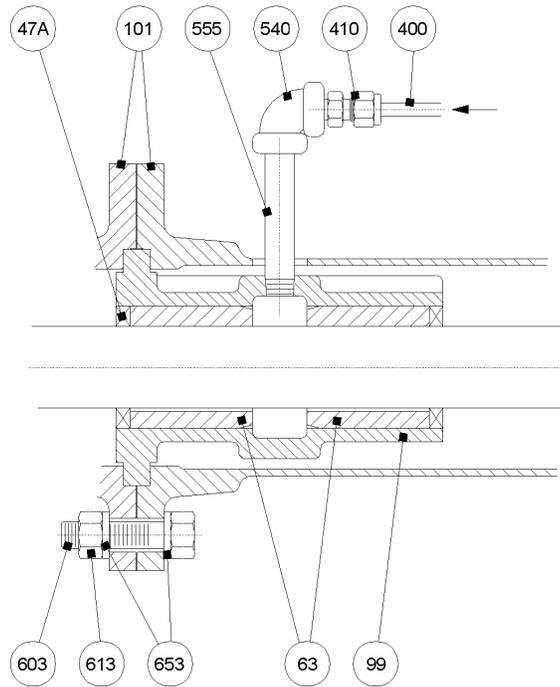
DETAIL OF SHAFT COUPLING FOR PUMPS WITH COLUMNS OVER 10 FEET LONG
